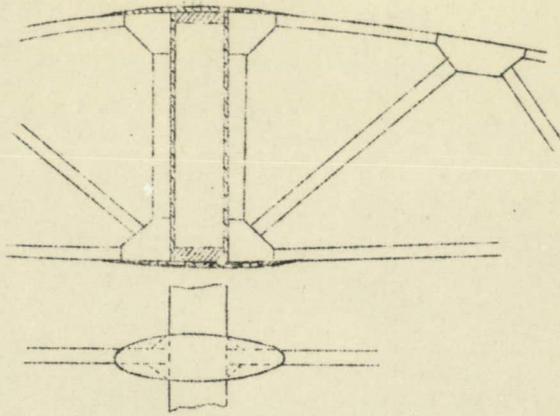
Divided rib for full-height spar with plywood reinforcing strips over flanges.
